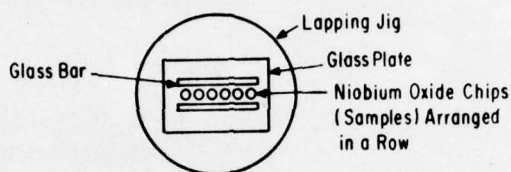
Schematic drawing of sample holder used in grinding and polishing step.
